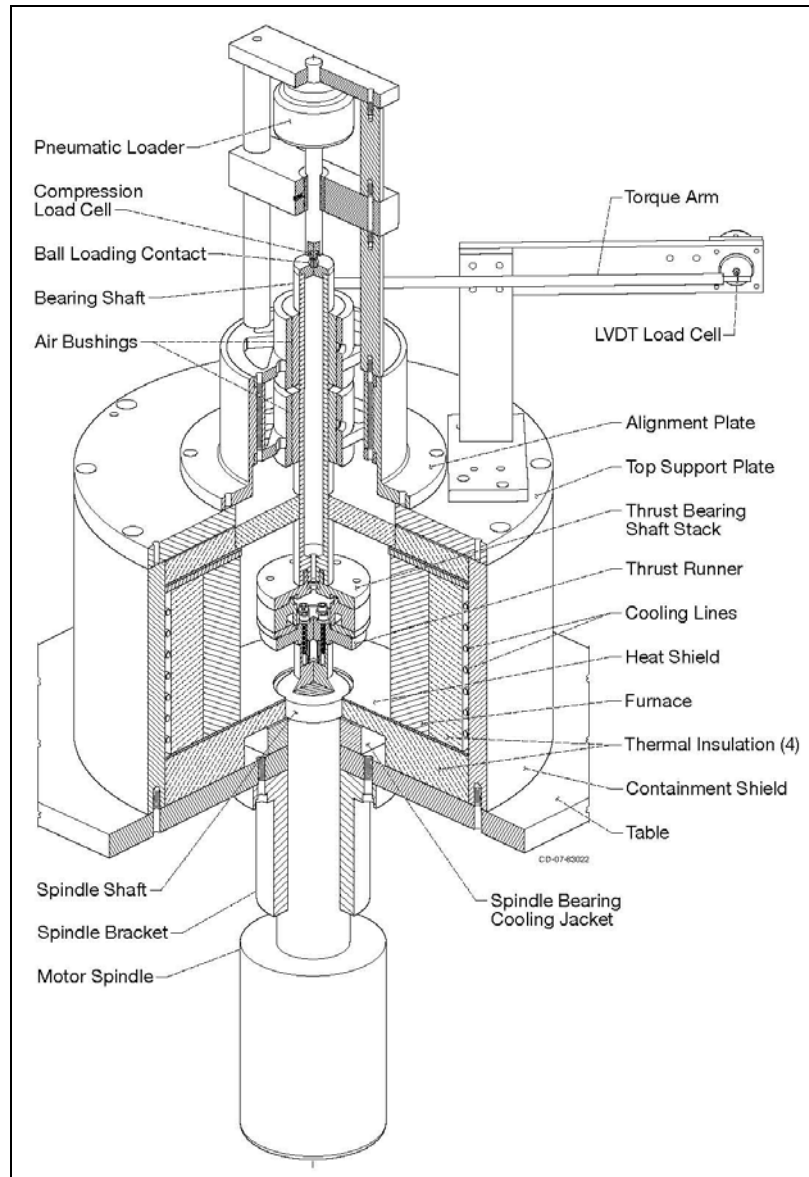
Section view of low-speed thrust bearing rig as assembled.
